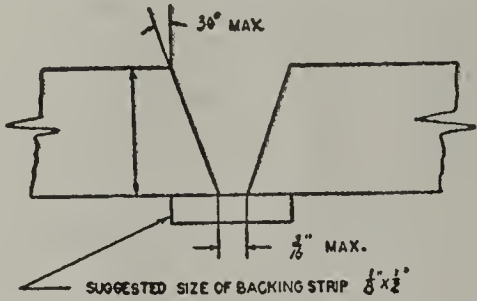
(a)—Butt Joint for Plate $\frac{3}{8}$ In. Thick
